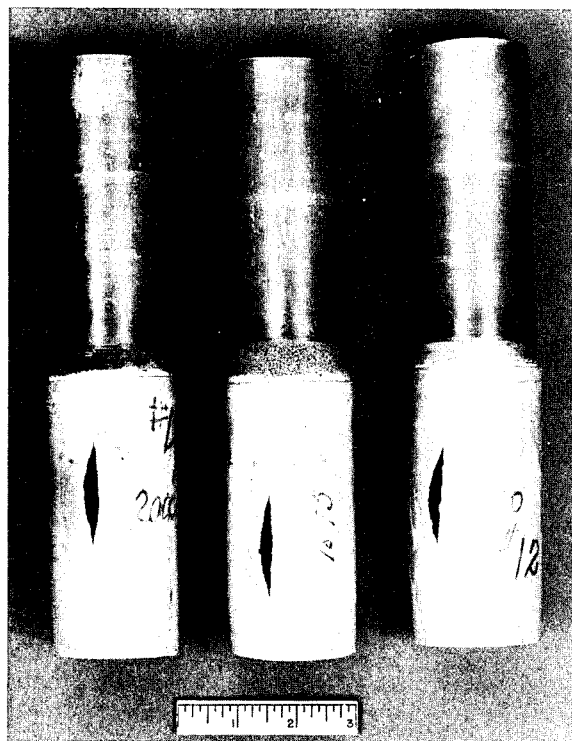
Two-inch-diameter brazed joints of 321 stainless steel to 6061 aluminum after burst test.
